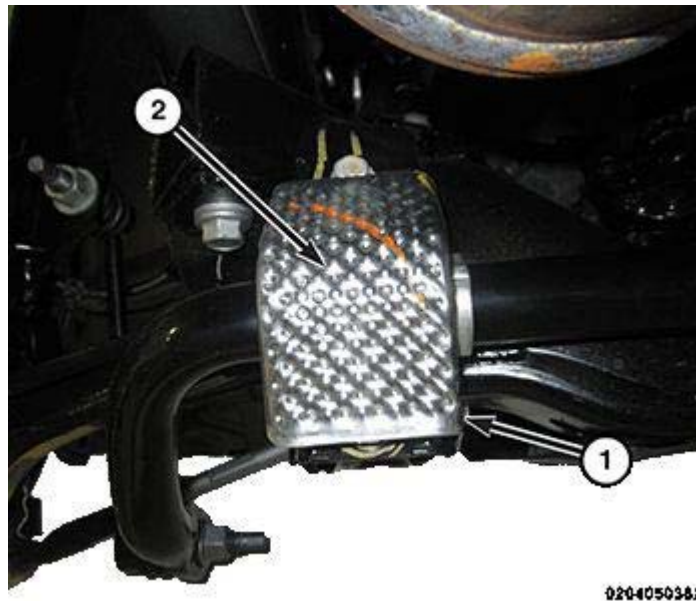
Stabilizer Bar Heat Shield & Bolt
